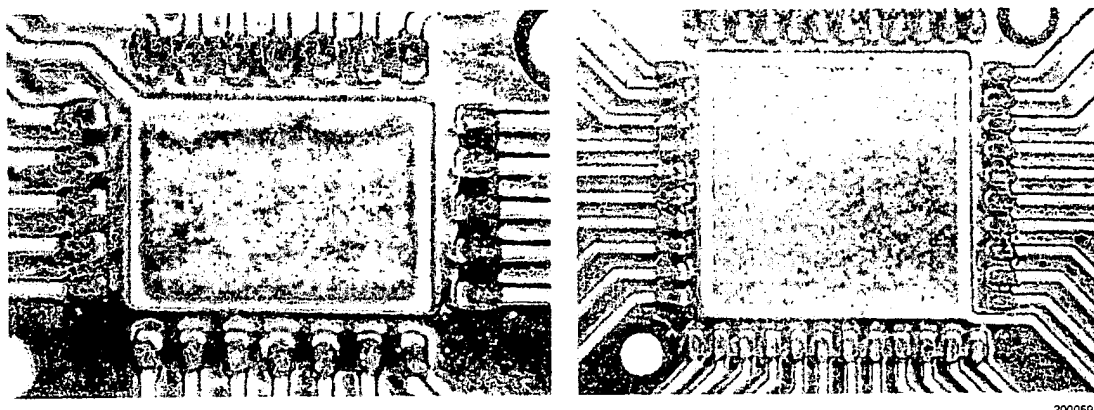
Solder Paste Printing of LLP 24 and LLP 44 Using 127 μ m (5 mil) Thick Stencil
